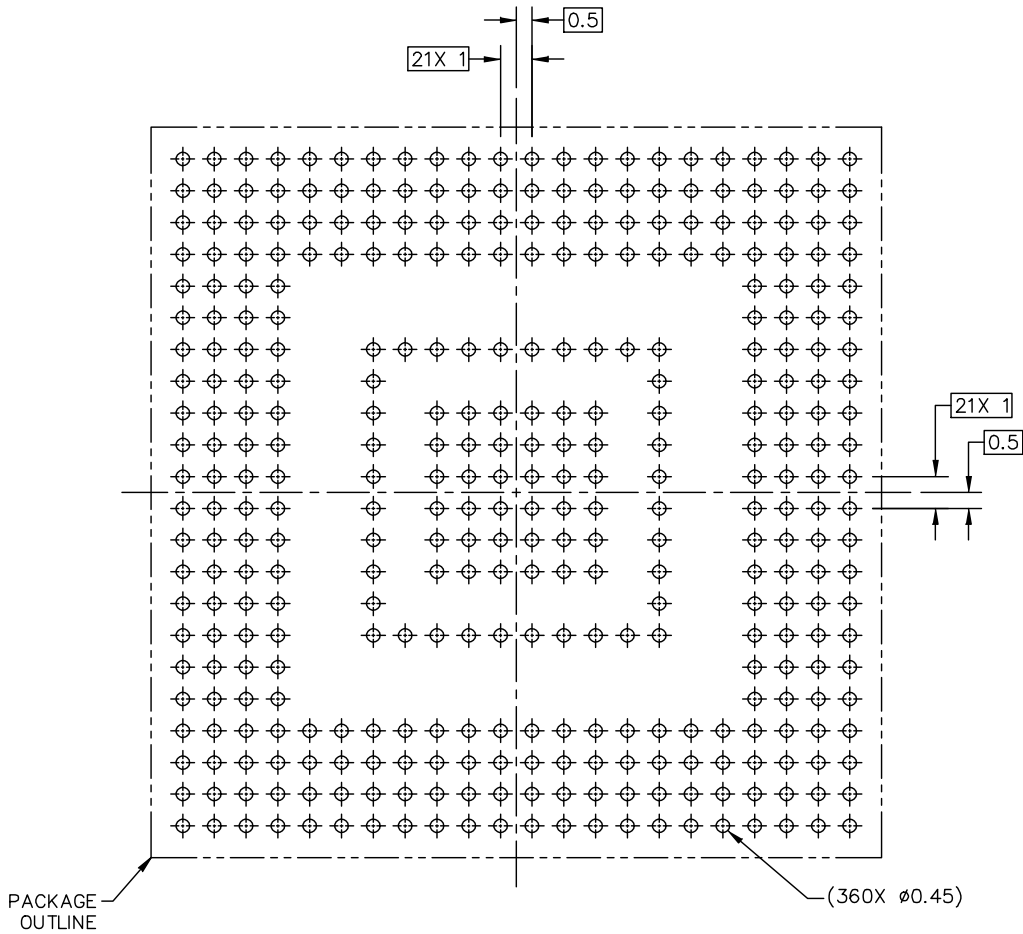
Reflow soldering footprint part1 for BGA360 (sot2091-1)
